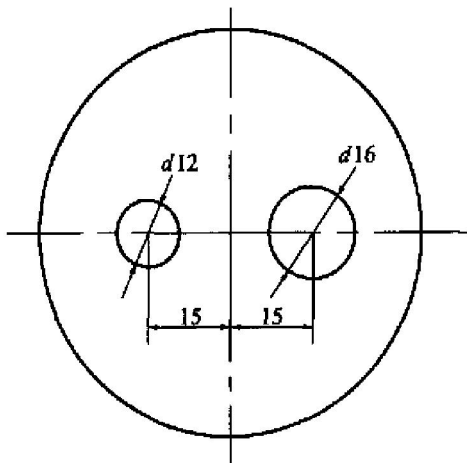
Die layout of extrusion test 2 (Unit: mm)
